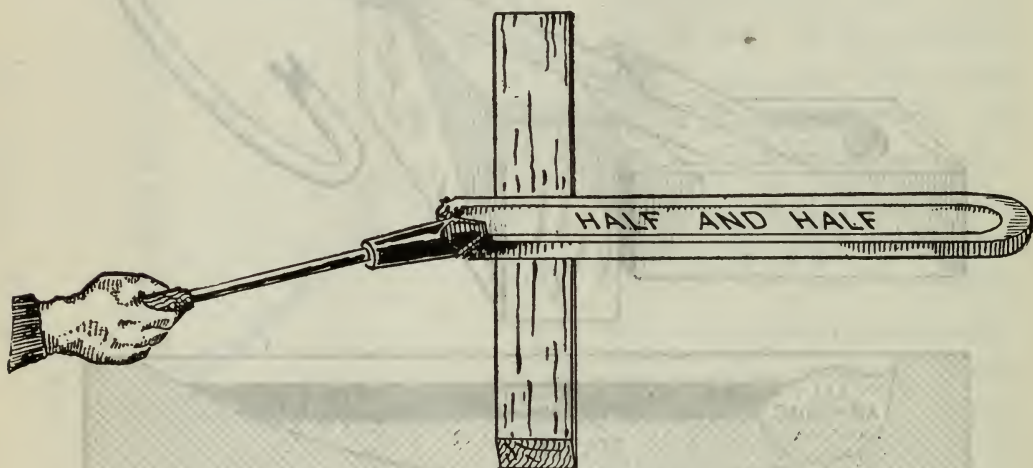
,456.—Picking up solder with a hot bit. This is the proper method for small work. Rest the bar of solder on some support as a brick or piece of wood and touch it with the end of the hot bit. Some of the solder will melt and remain on the bit. It is then transferred to the part to be soldered, and if the surfaces be in proper condition and fluxed when the bit touches the surfaces, the solder will leave the bit and cover the surfaces. In picking up solder from the stick, care should be taken not to leave the bit in contact with the solder too long or some of it will drop off. The larger the bit and area tinned, the more solder will the bit hold.
